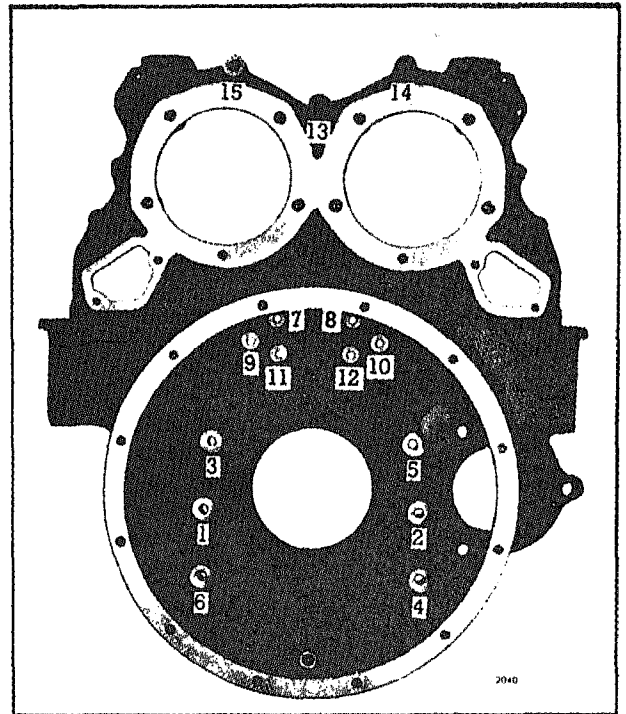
Flywheel Housing Bolt Tightening Sequence (Operation 2)--In-Line Engine
